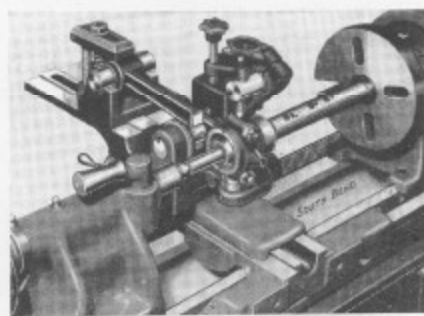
Boring, Facing and Filletting a Rebab-bitted Connecting Rod in the Lathe.
